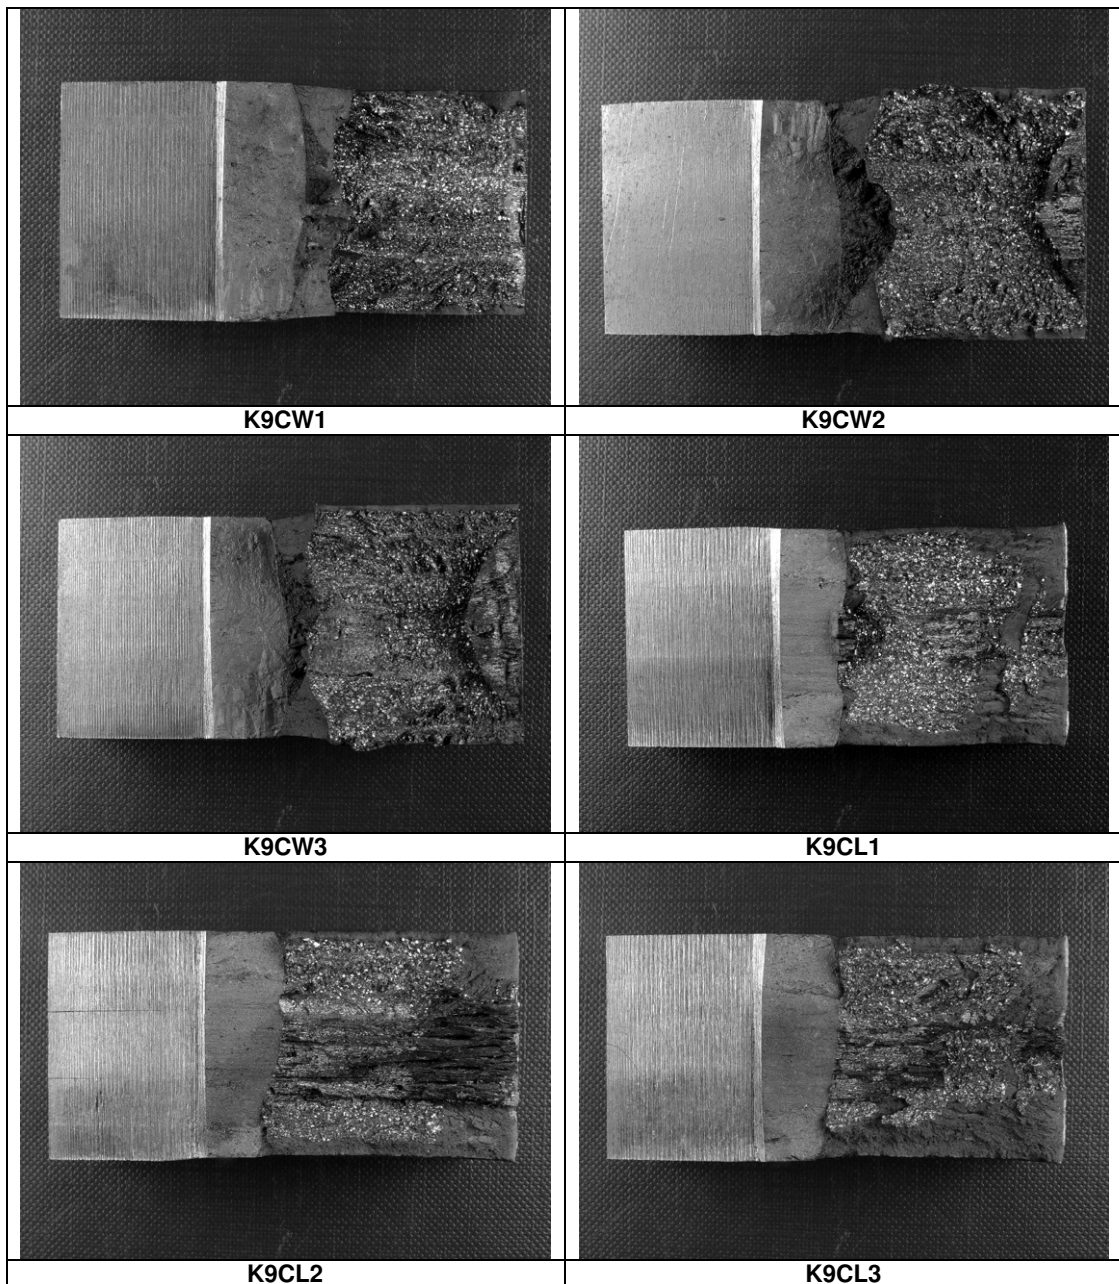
Fractographs of CTOD samples from 30 mm thick FCAW weld (K9).
